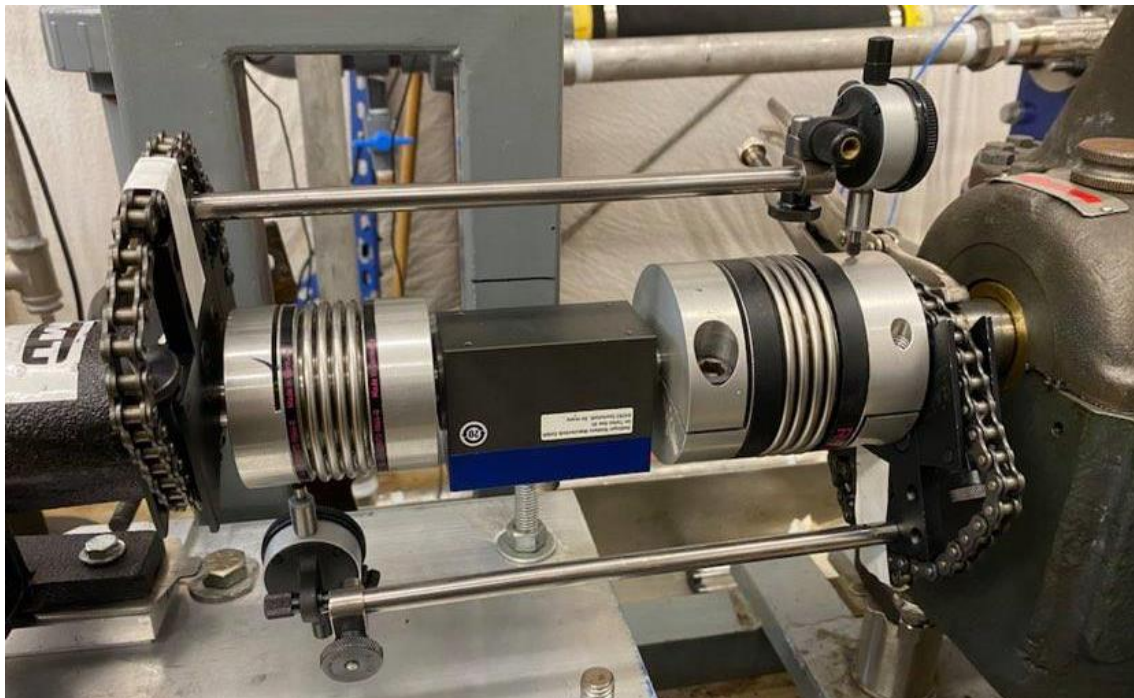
The turbopump safety coupling setup. The dial indicators were mounted as a part of the reverse dial indicator method for shaft vertical alignment.
